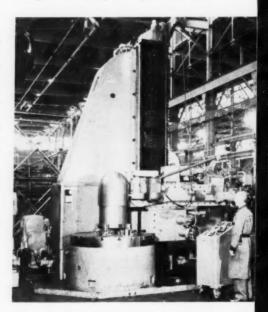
This overall view of the new Bullard Swiveling Single Head Grinding Machine shows the operator control console.
